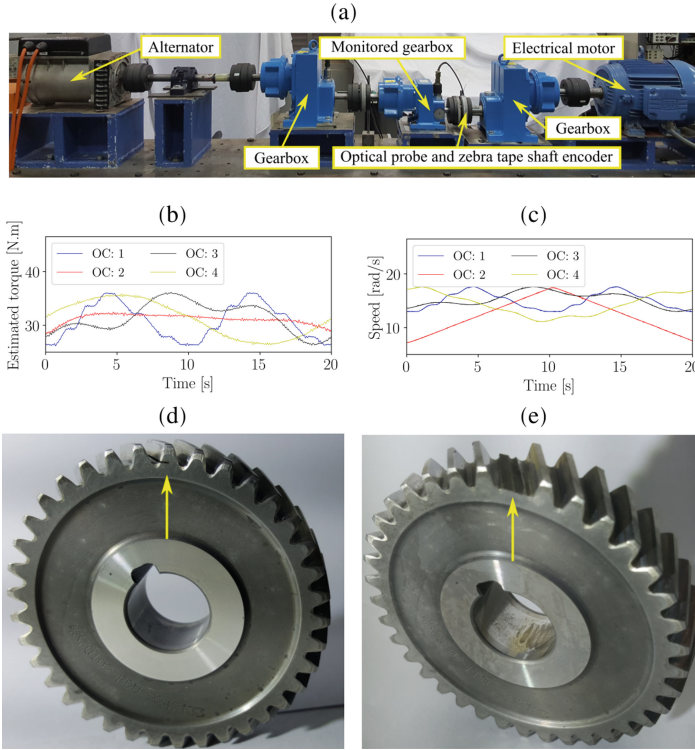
(a) Experimental test rig. (b) The rotational speed of the input shaft of the monitored gearbox. (c) Load at the input shaft of the monitored gearbox. (d) Gear before the experiment started (0% complete). (e) Gear after the experiment was completed (100% complete).
